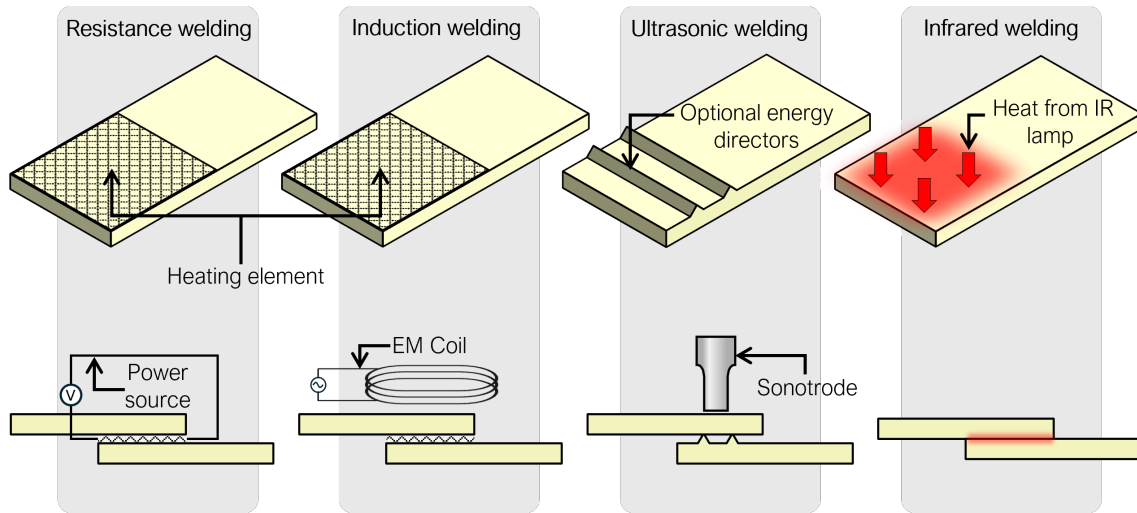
Illustrations of resistance, induction, ultrasonic and infrared welding [147, 148]—the four welding methods demonstrated in acrylic-matrix composites.
